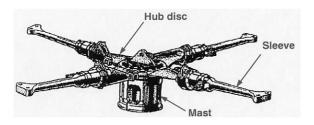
Drawing of a helicopter rotor assembly showing three parts that were changed from Ti-6-4 to Ti-10-2-3 to enable a gross weight increase.
